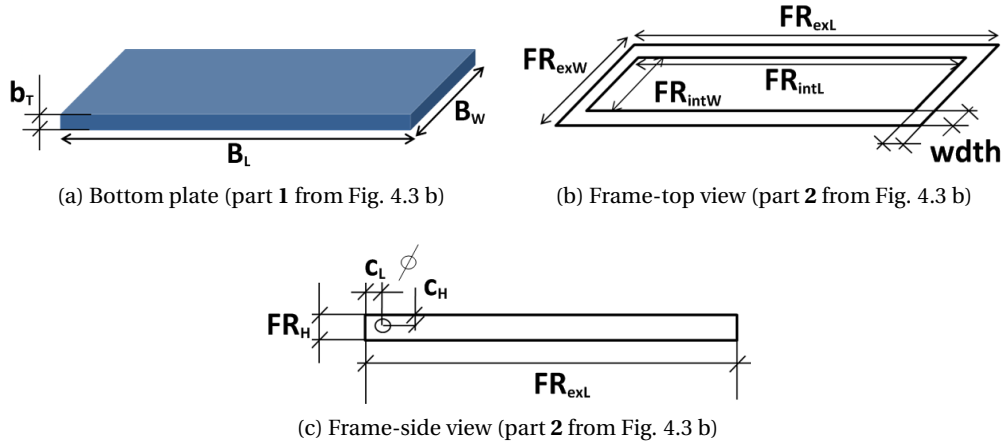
2D sketches of the designed mold: (a) Bottom plate, (b) Frame - top view, (c) Frame - side view.
